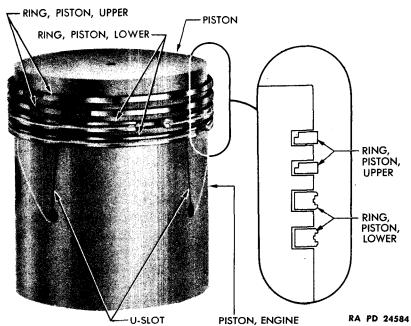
Piston And Rings, Showing Ring Gap Locations
